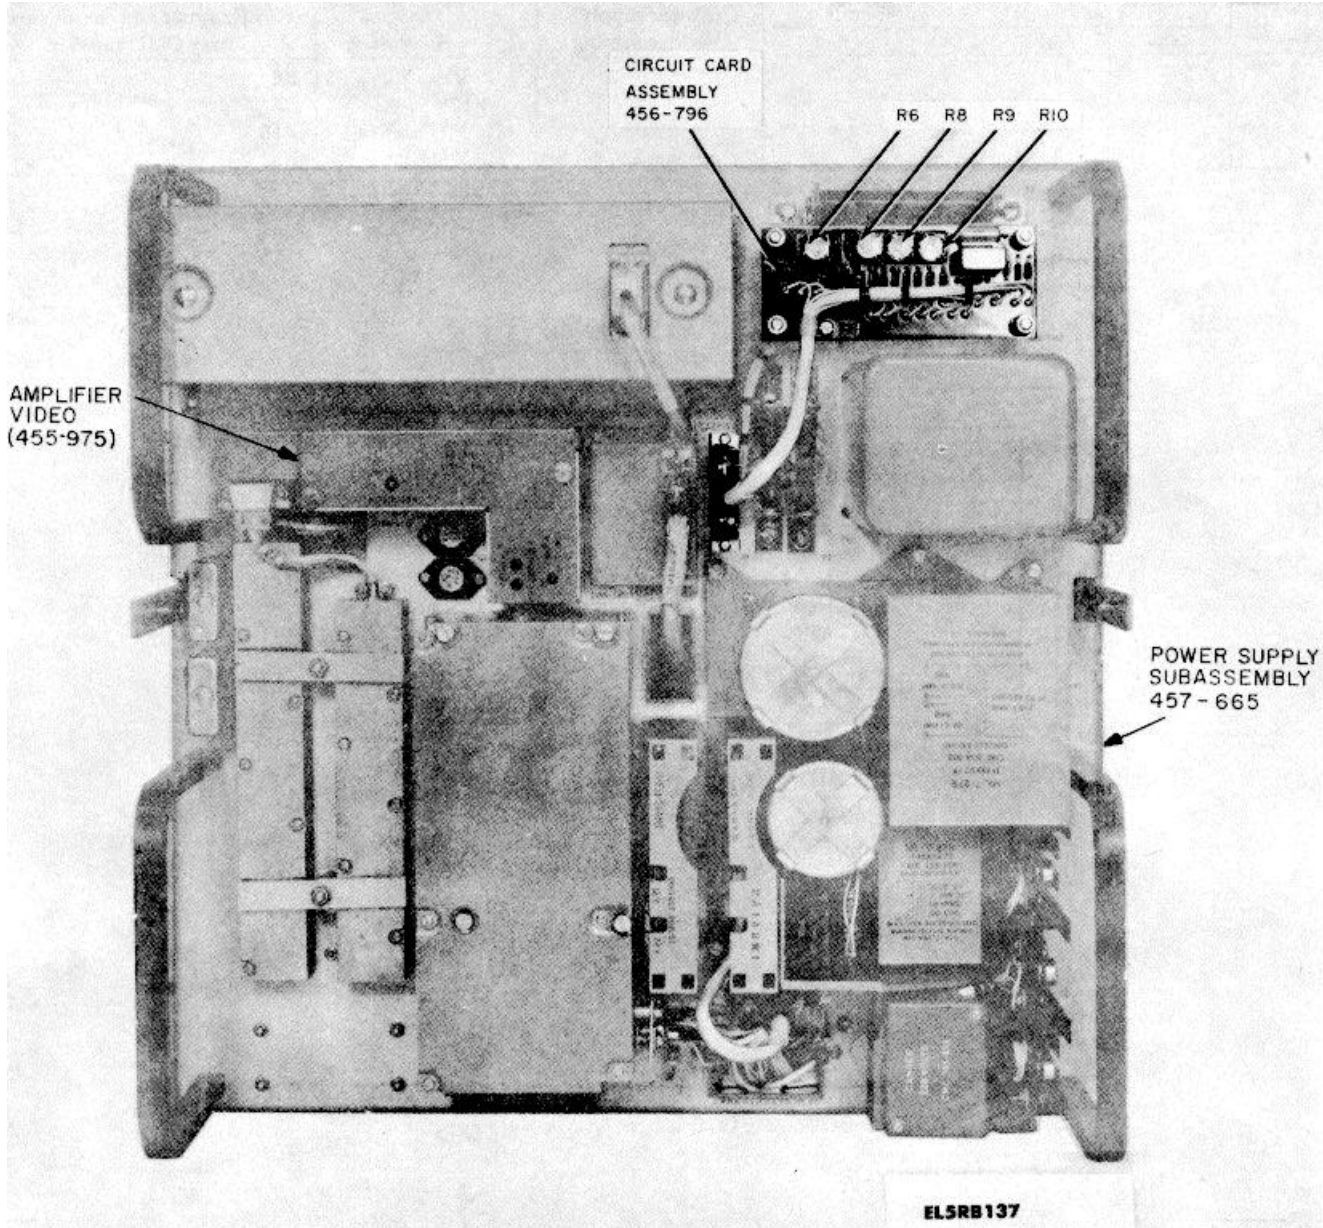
Receiver Test Facility Rear Chassis, Rear View.
